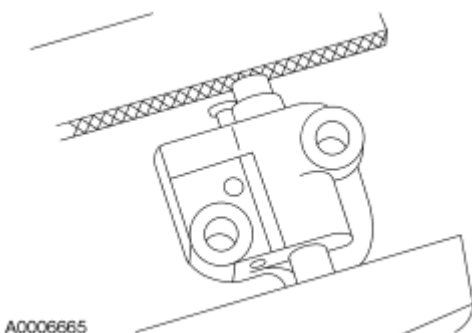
Identifying Chain Tensioner In Soft-Jawed Vise
